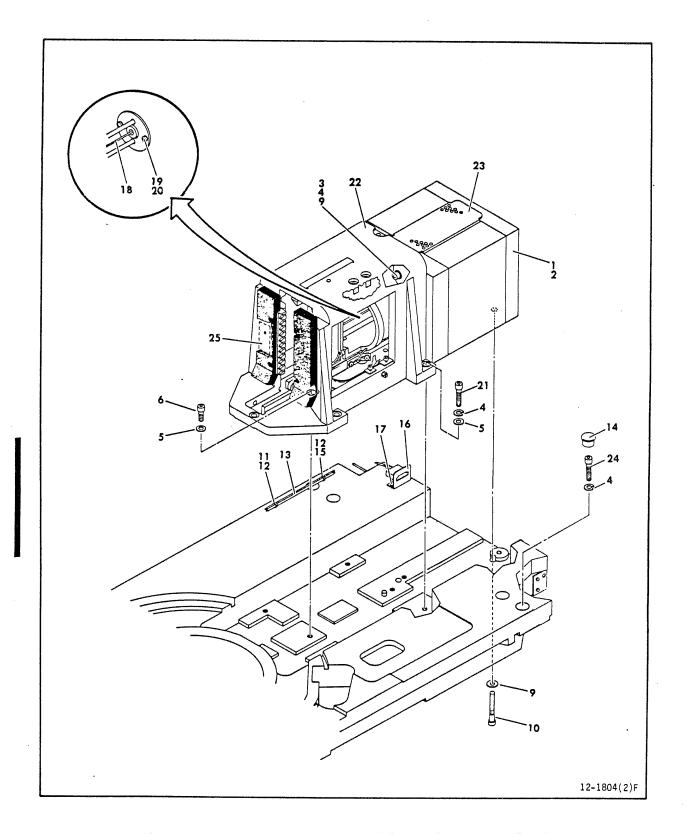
A-20. Deck Assembly (Sheet 2 of 3)
